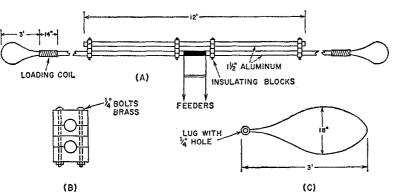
Constructional details of the driven element — (A) the complete assembly, (B) the mounting insulator and (C) the "carpet beaters".
